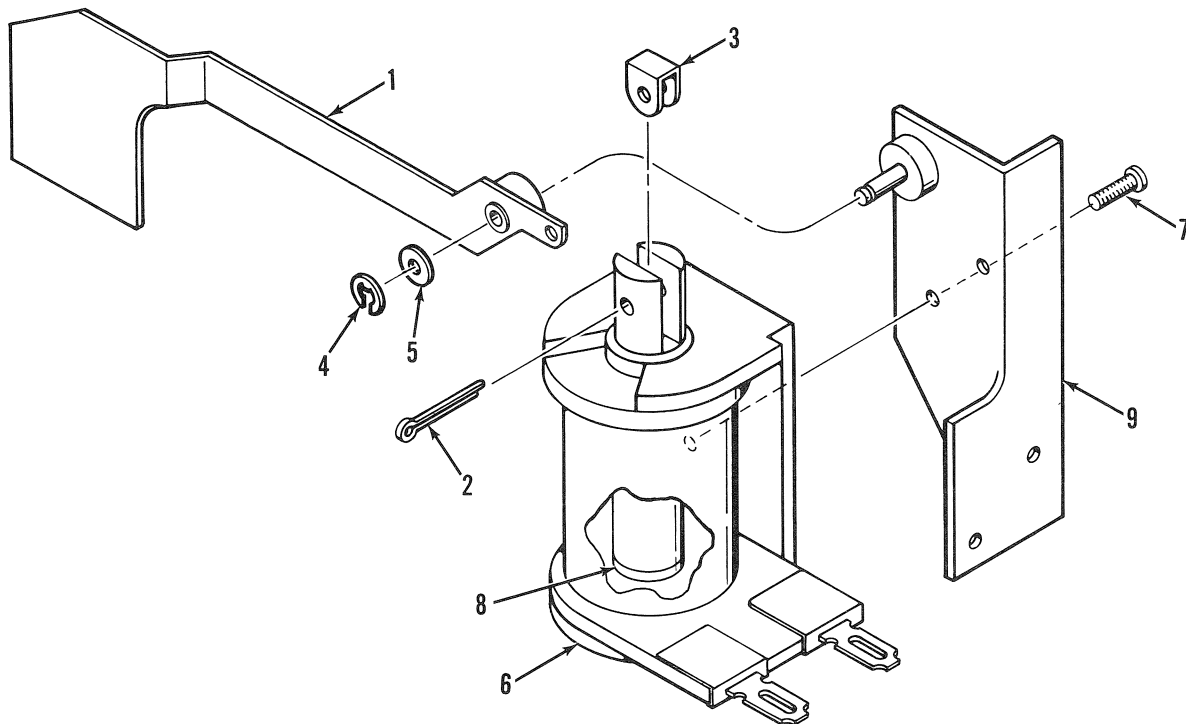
DOUSER AND SOLENOID ASSEMBLY
